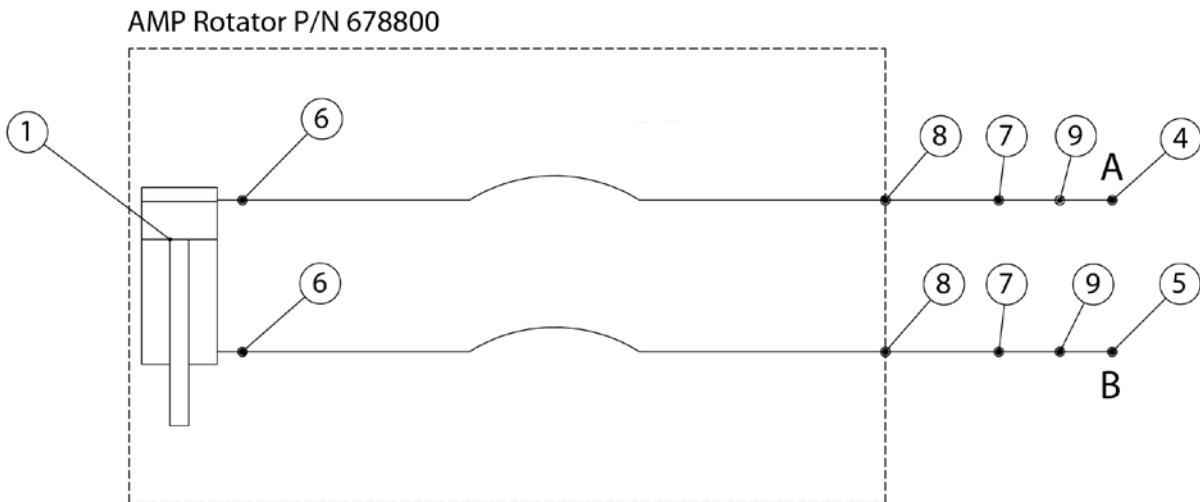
678800-H Hydraulic Assembly Single Rotator (double acting)
